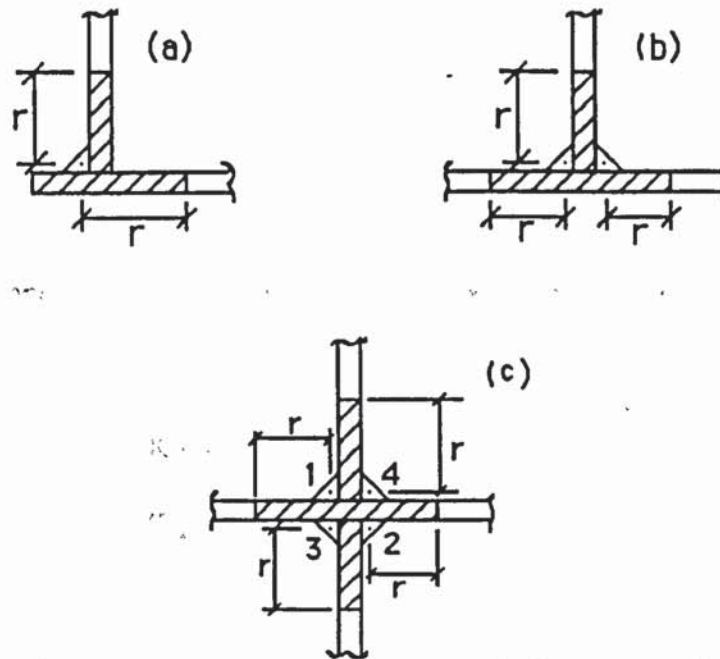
Extent of HAZ for fillet welded joints^(3,4). (a) Single fillet corner weld, (b) 'T' fillet weld, (c) Cruciform joint.
